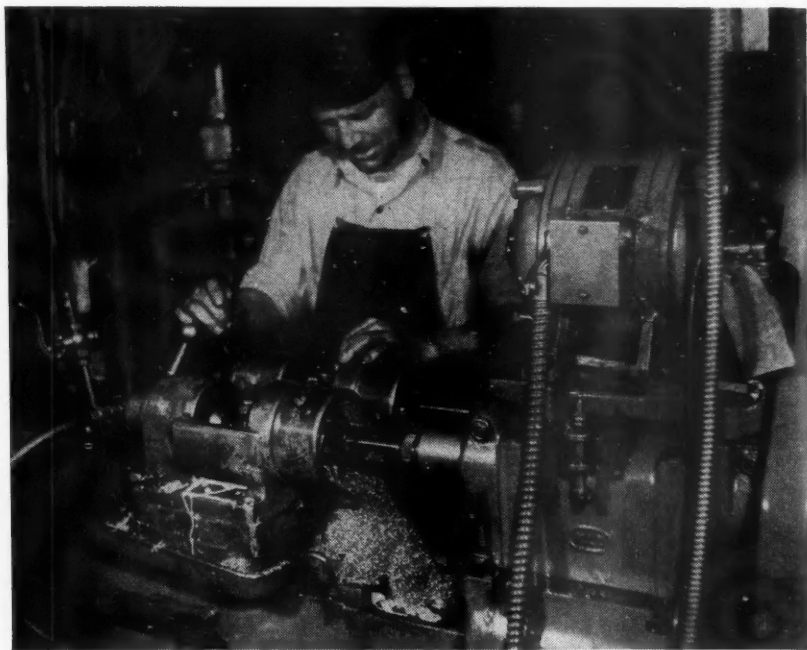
Accurate finishing of gears, of course, would be useless without accurate finishing of the bores of gears which fit over a shaft, particularly after bushings are assembled in such bores. Here is shown the diamond boring operation on the idler gear bore.
